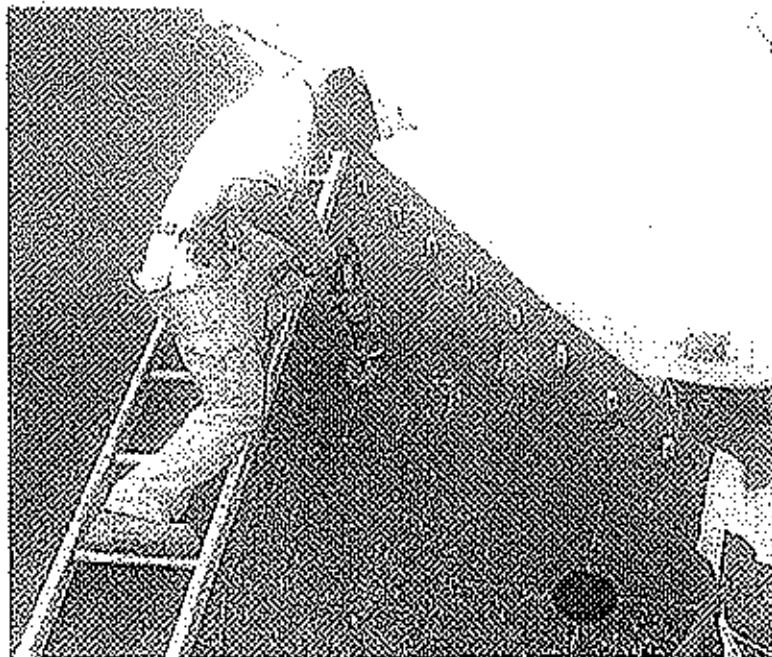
Drill Hole For Flanges (After Transferring As Built Position)
